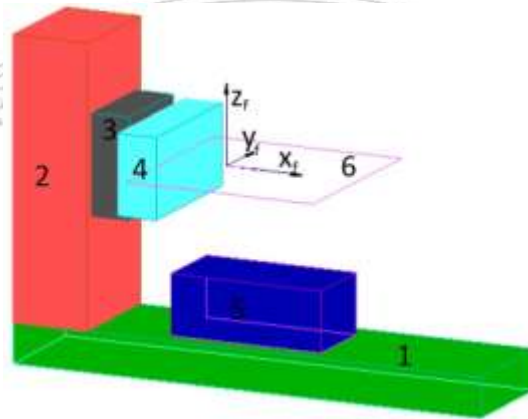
Cylindrical gear milling machine structure with fixed coordinate systems.
